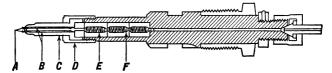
Open Type Hesselman Nozzle. A—Twin openings in nozzle tip; B—Twin grooves in nozzle insert feed fuel to tip openings; C—Stainless steel nozzle tip; D—Nozzle assembly nut; E—Triple spring check valve; F—Half ball checks.
